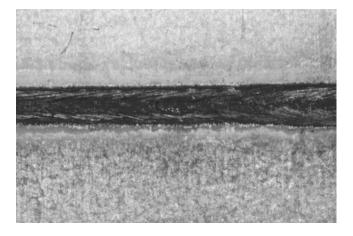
Surface appearance of a lap weld made on 1.0 mm galvannealed steel using a 3 kW Nd:YAG laser, welding speed 5.0 m/min, with 50 μ m Al foil inserted between the sheets.
